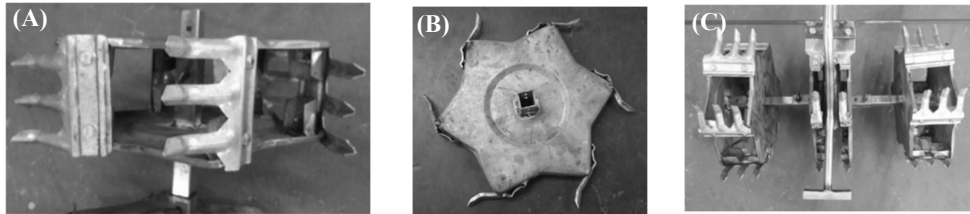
Rotor and rotor arrangement showing; double rotor (A), single rotor (B) and single and double rotor (C).
